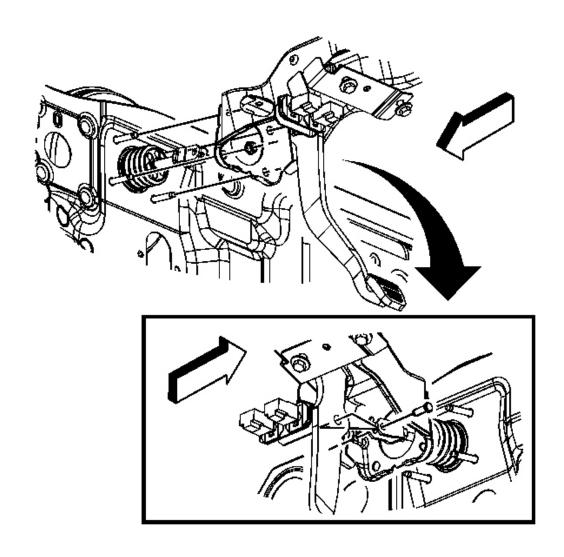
Locating Clevis Pin At Master Cylinder Push Rod Courtesy of GENERAL MOTORS CORP.
